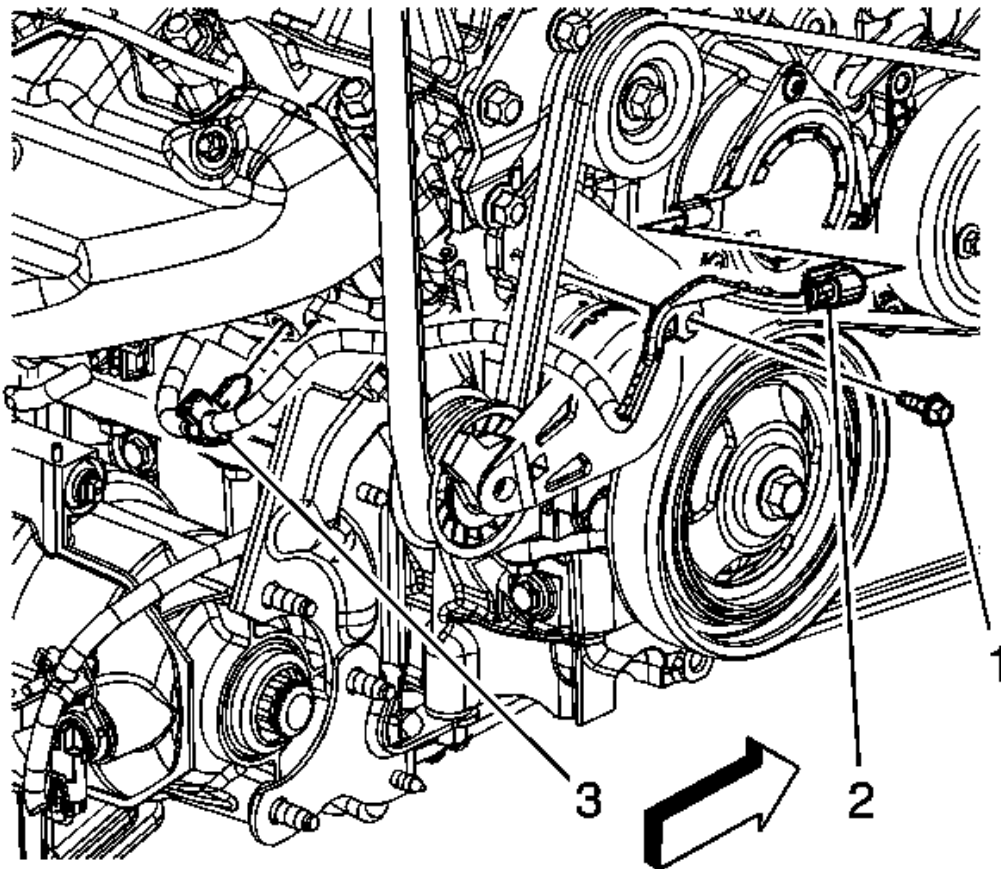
View Of Engine Wiring Harness Electrical Connector
